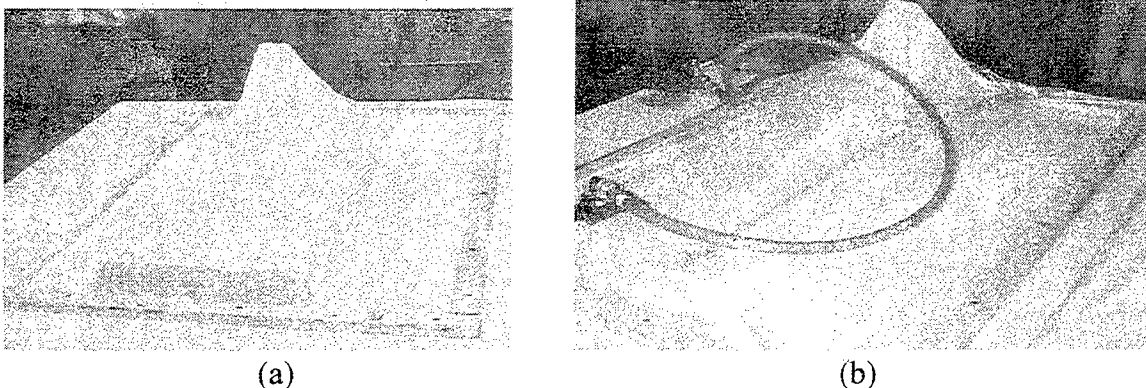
Vacuum Bagging Process for Wind Turbine Airfoil: (a) Latex Rubber Vacuum Formed on the Foam Mold (b) Vacuum Bagged Wind Turbine Skin Panel.[5]
